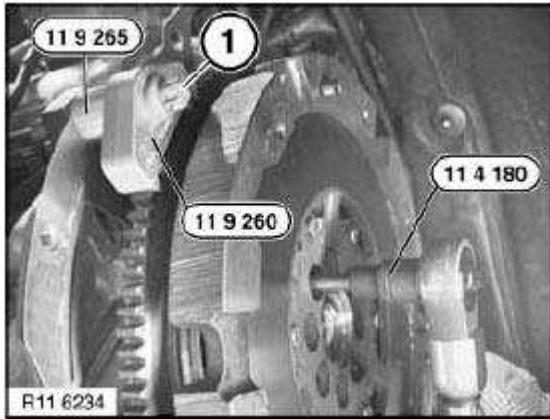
Special Tools (11 9 260), (11 9 265) And (11 4 180)
